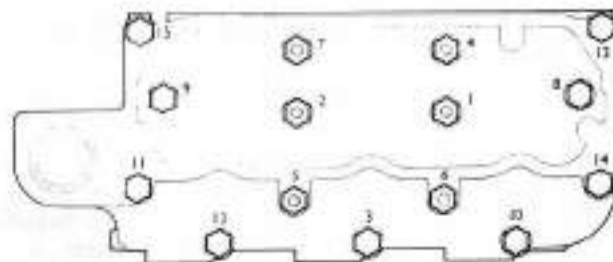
Sequence for tightening cylinder head bolts on four cylinder models 990 and 1200.
